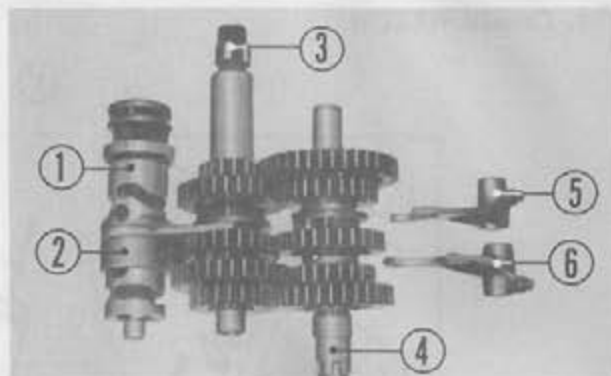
① Gearshift drum ⑥ Left gearshift fork
